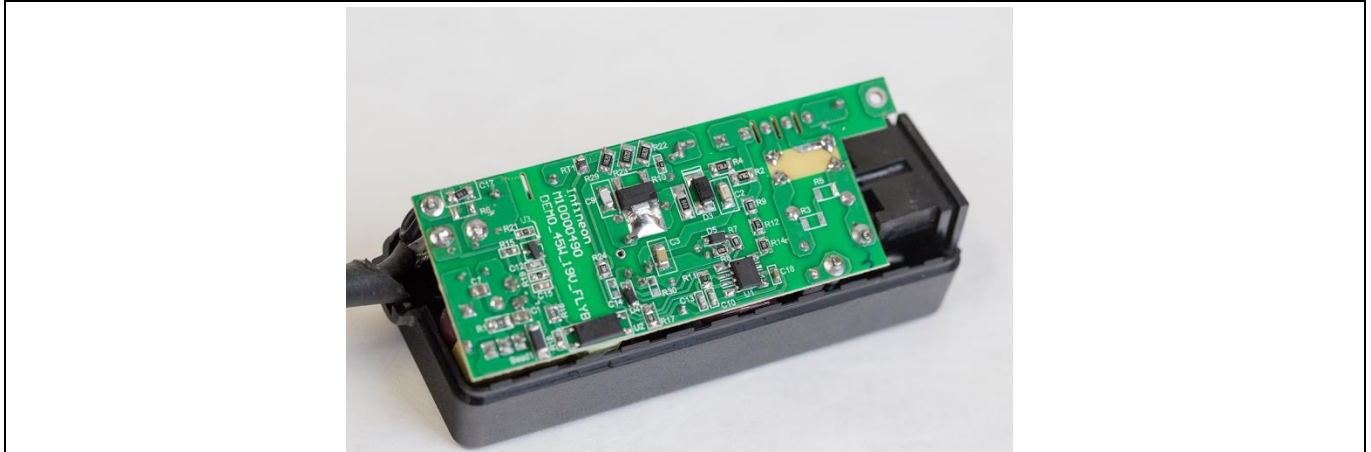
Bottom side of the 45 W P7 SOT-223 demo board shown inside an enclosure
